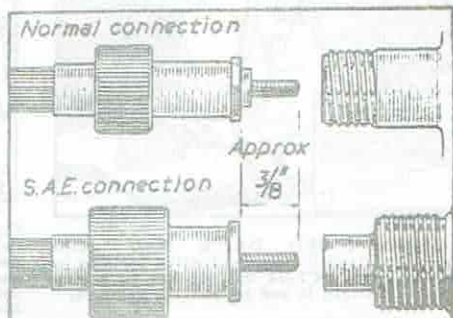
INNER SHAFT PROJECTION. Check that there is approximately 1/2 in. projection of inner shaft beyond outer casing at instrument end. This ensures correct engagement in instrument and point of drive.
